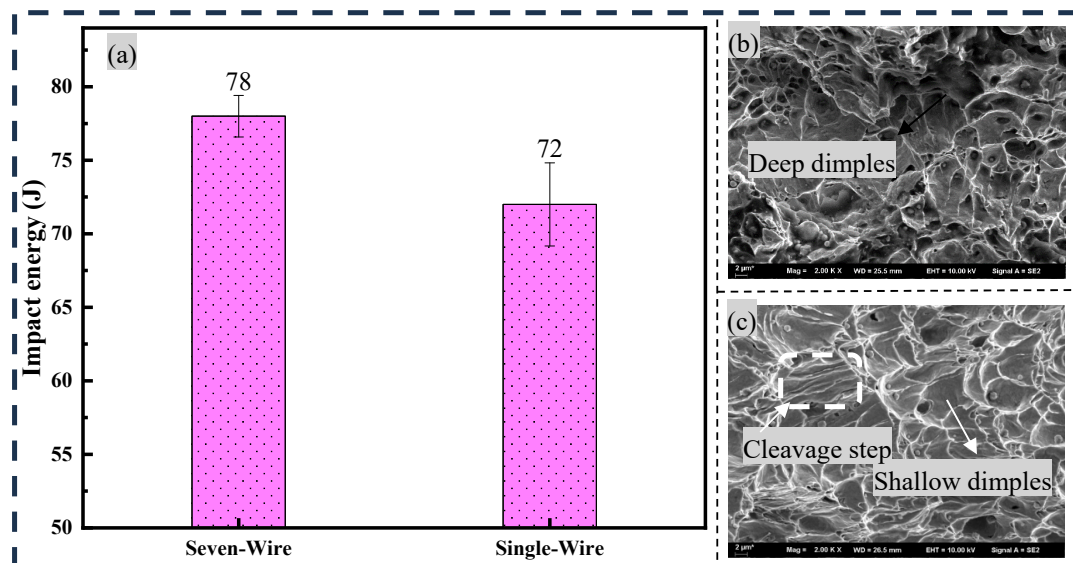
Impact result of welded joints between SRA EGW and single-wire EGW
